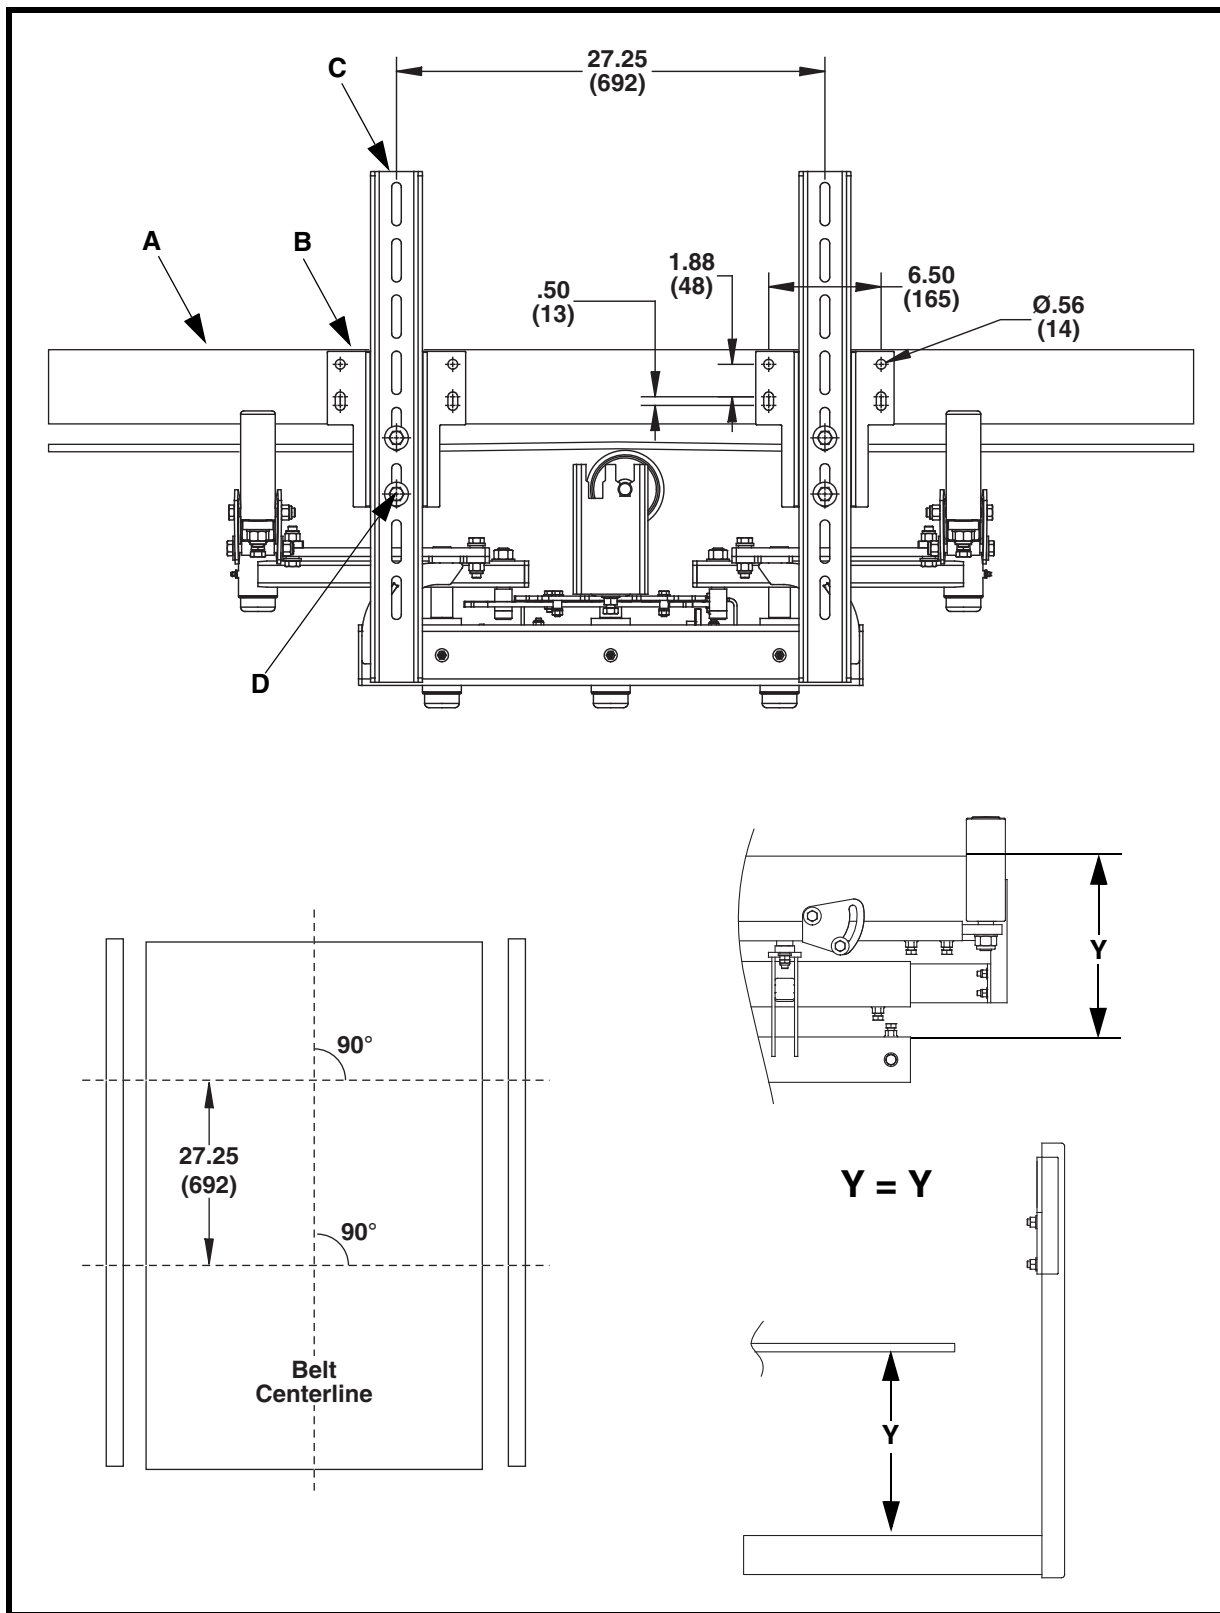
Mounting Dimensions–Martin® Tracker™ Reversing HD (Lower Unit)
